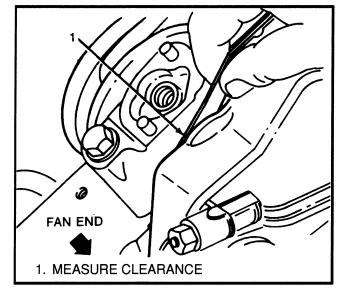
MEASURE THE AXIAL CLEARANCE OF THE CRANKSHAFT
